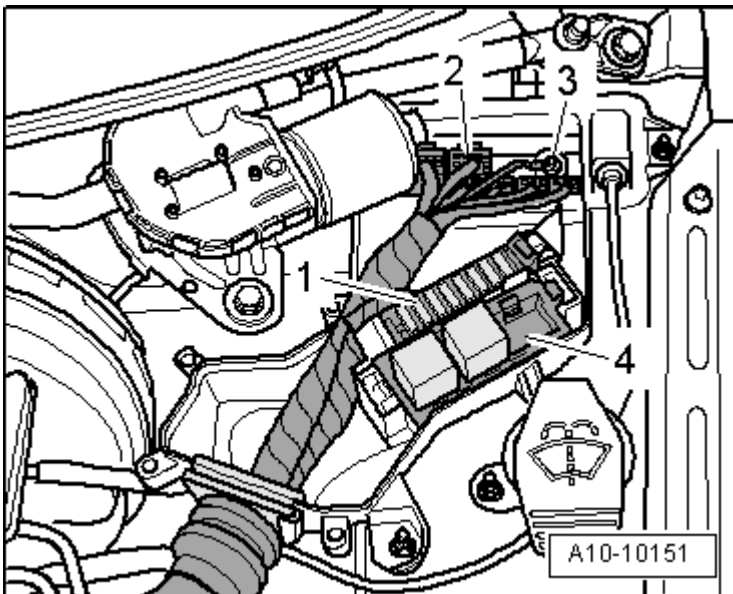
Pulling Connector And Vacuum Hose Out Of Bracket
